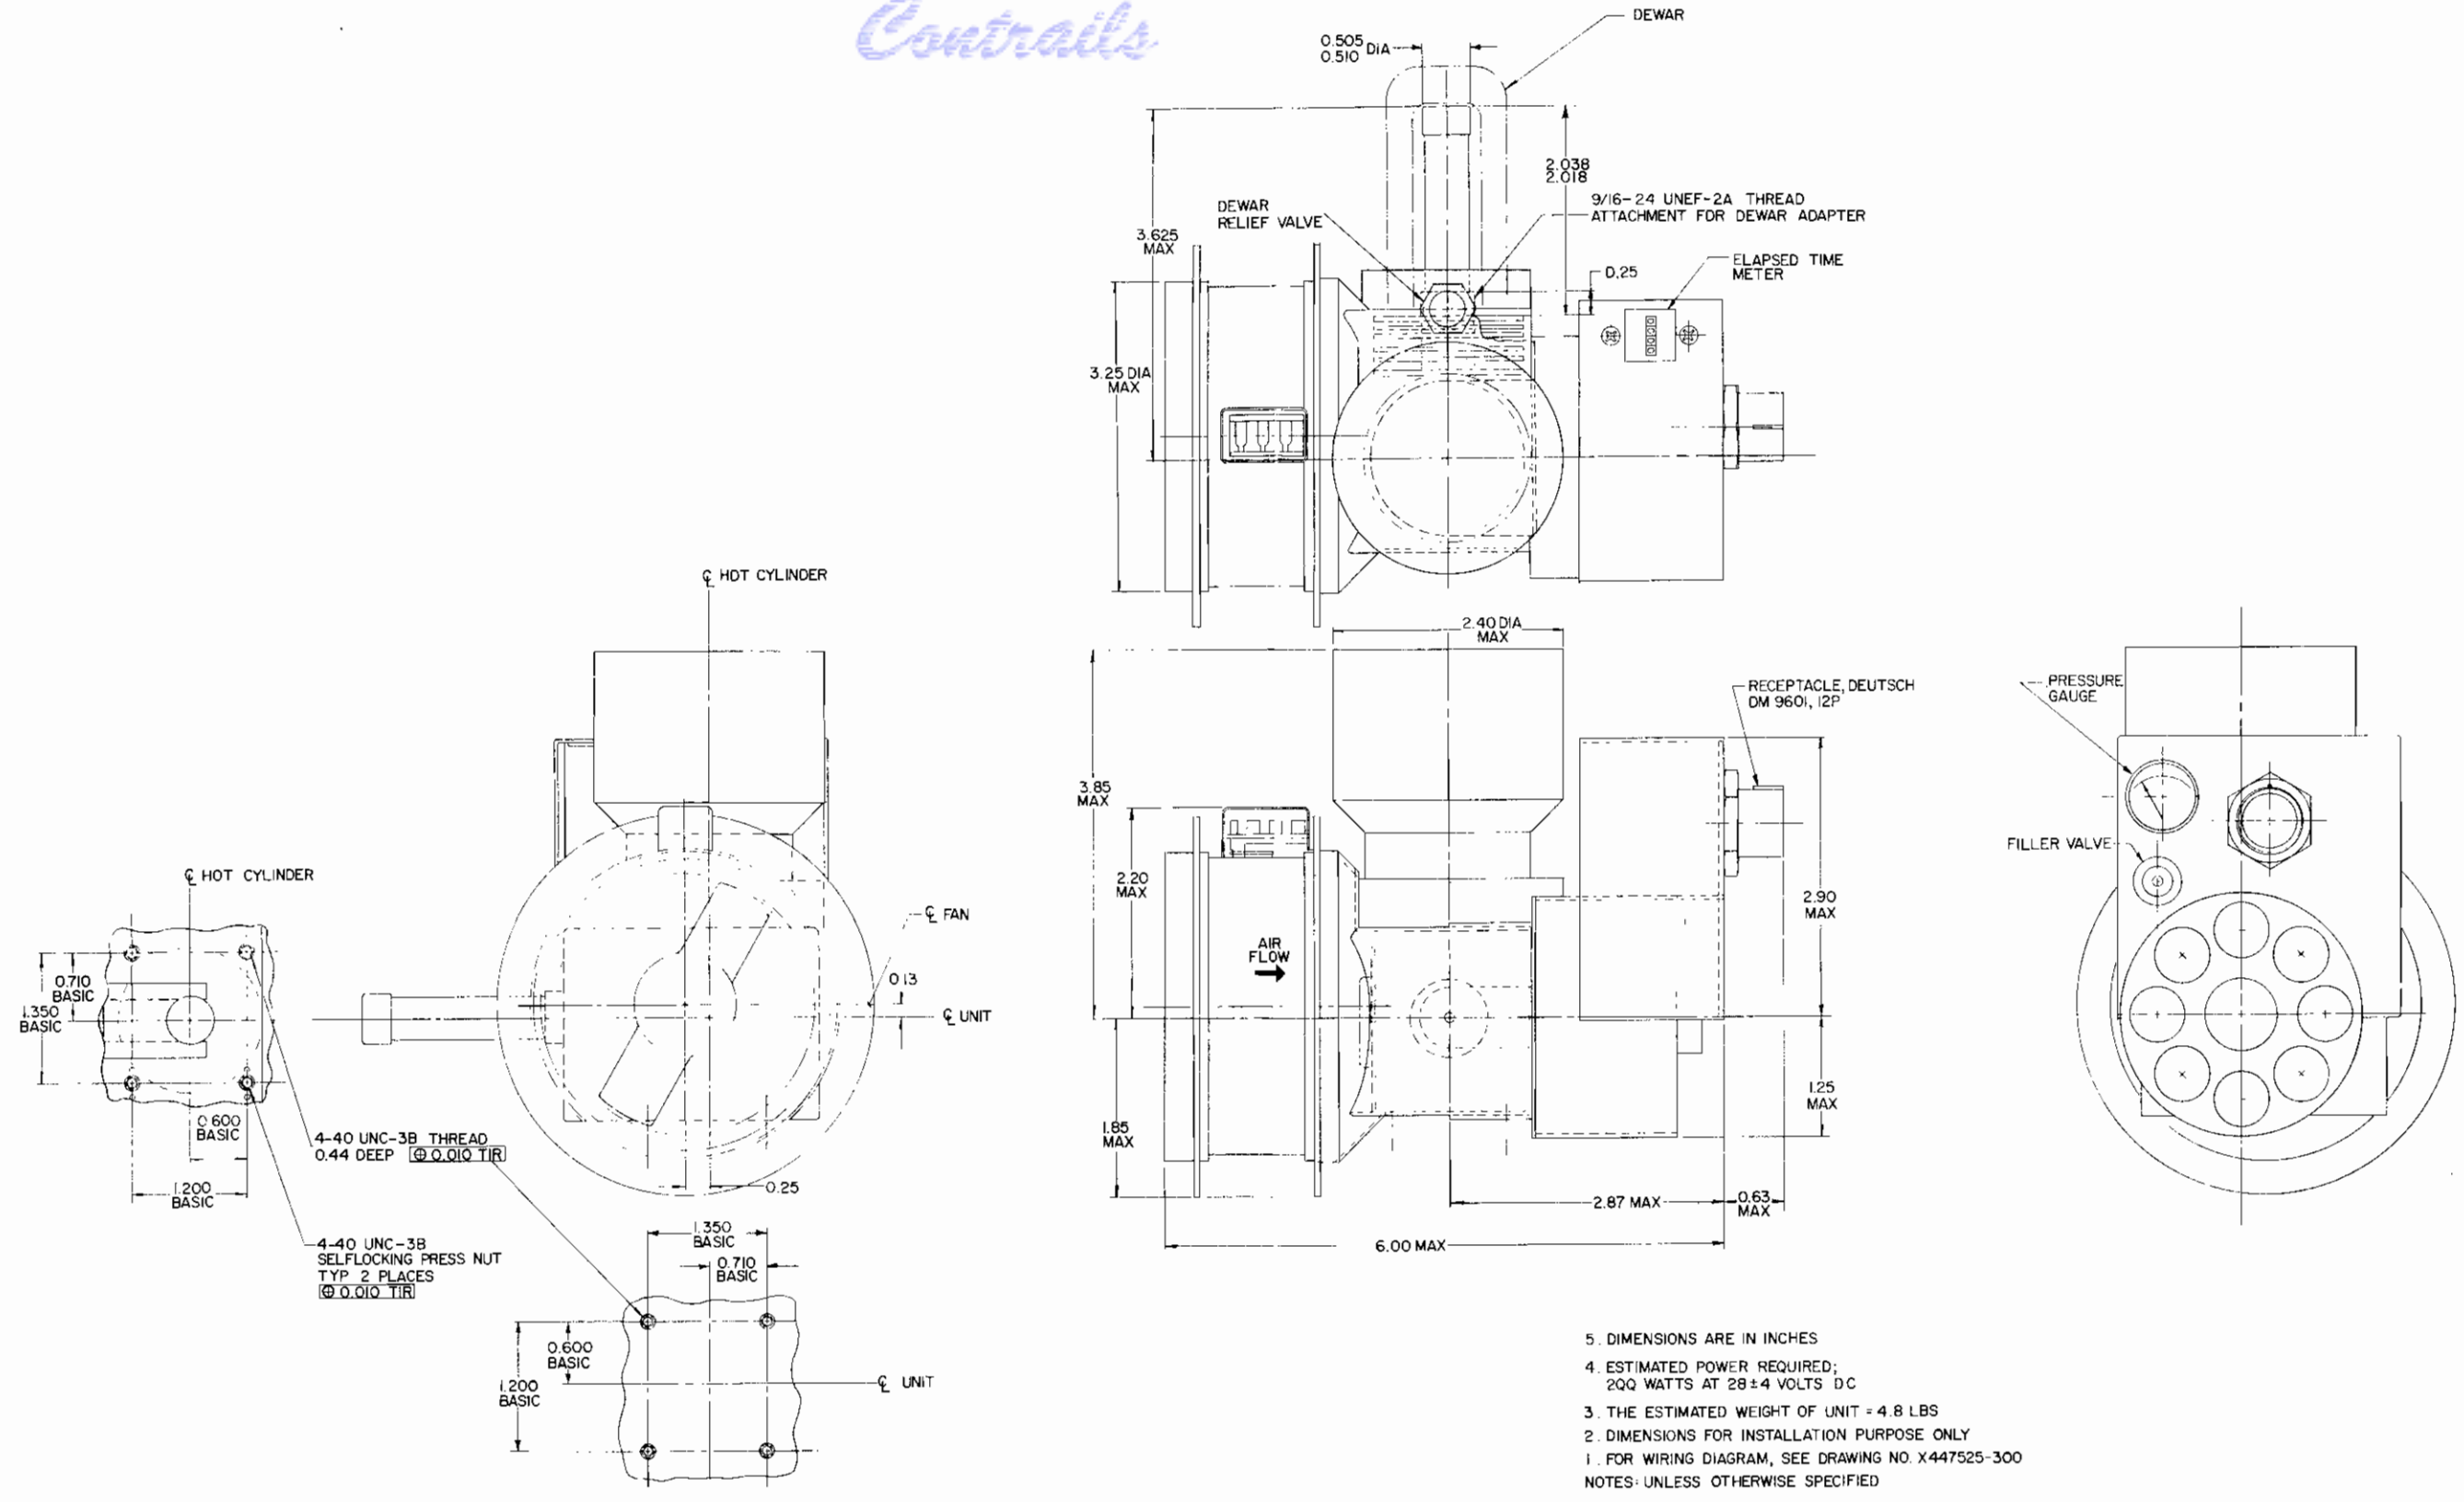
Outline and mounting drawing of VM refrigerator X447525-100
